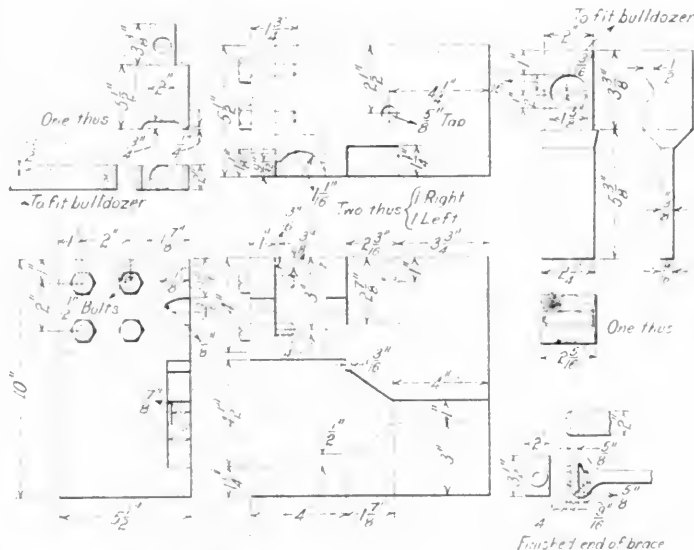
Dies for Forging the Back End of Back Tube Sheet Braces
